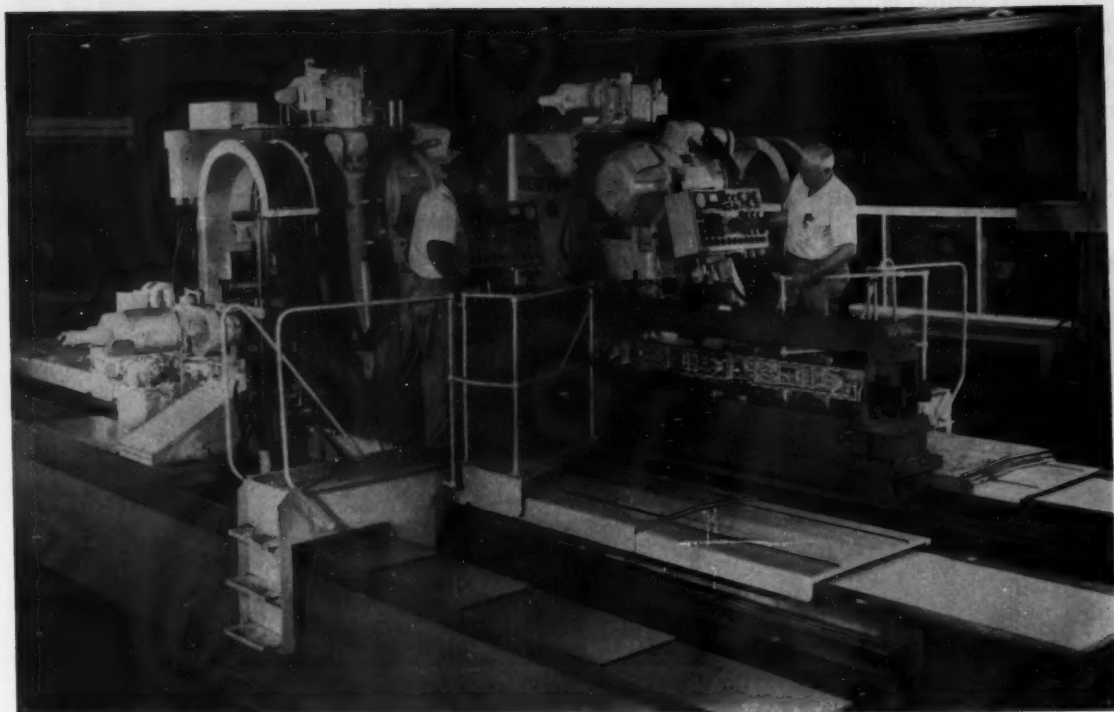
Double-head milling machine which is also tape-controlled for the simultaneous machining of configurations on both sides of long, complex parts.
